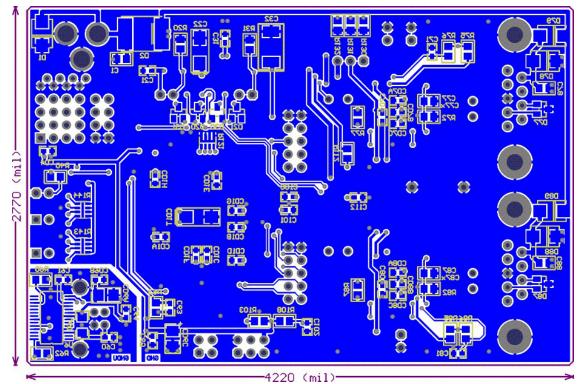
PCB Bottom Composite Drawing (Mirrored)
